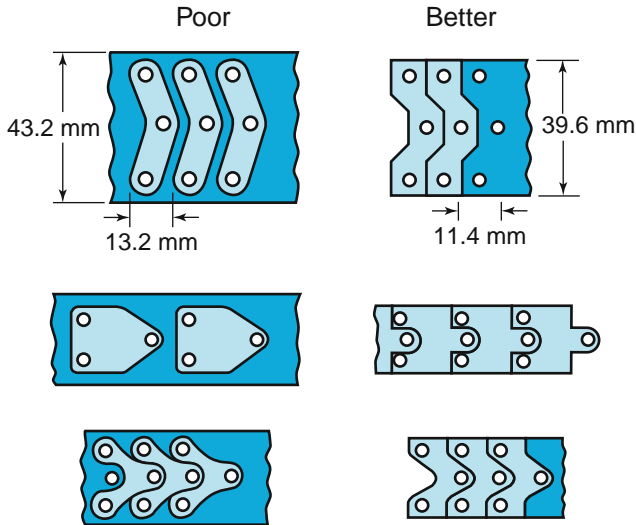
Efficient nesting of parts for optimum material utilization in blanking. *Source:* Courtesy of Society of Manufacturing Engineers.
